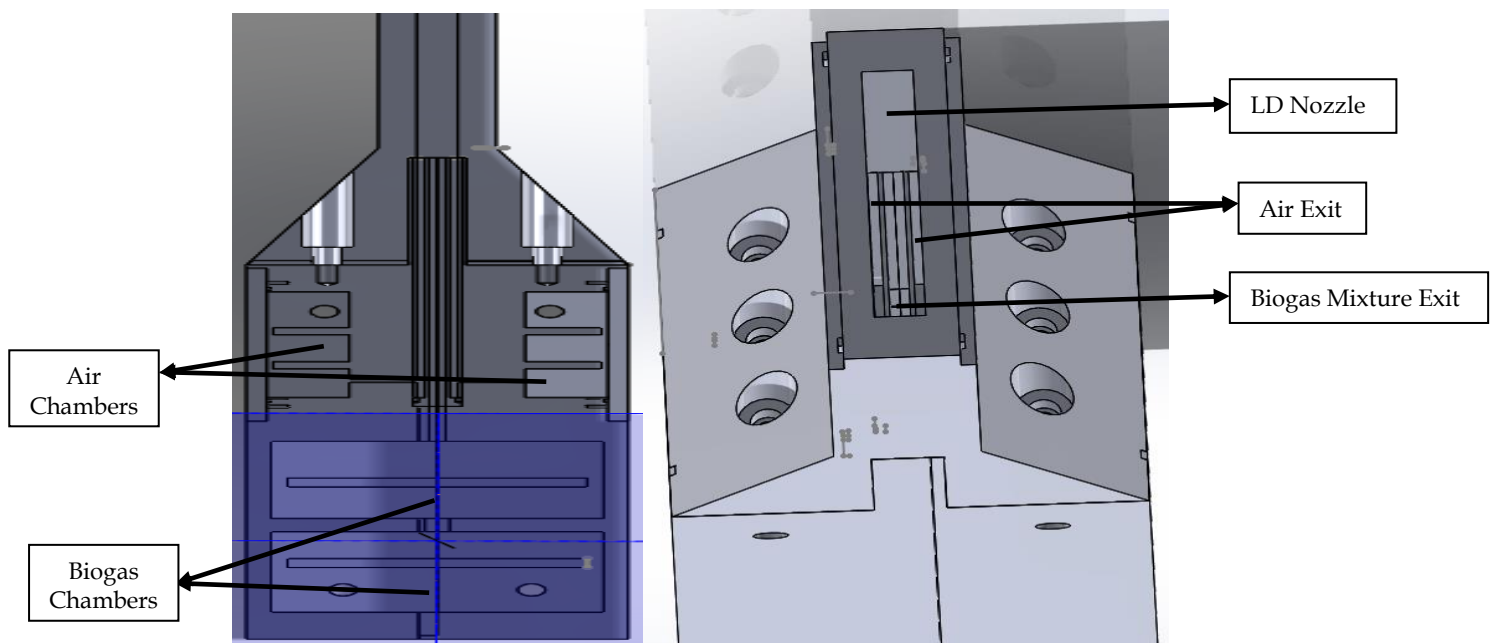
Longitudinal section view and top view of the burner in Solid Works
